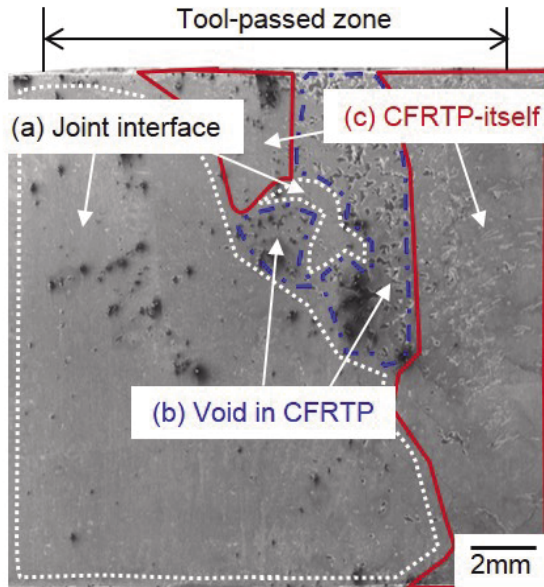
SEI of the fractured surface in the tool-passed zone on the A5052 side of fractured joint at the tool rotation speed of 2000 rpm.
